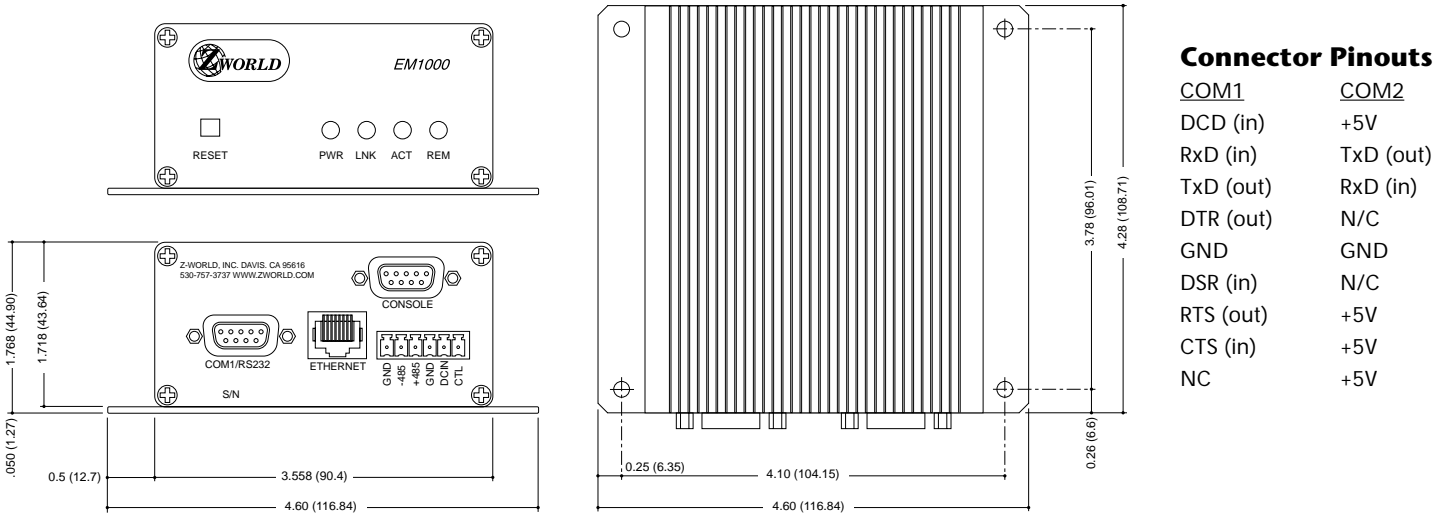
EM1000 Enclosure and Mounting Plate Dimensions
